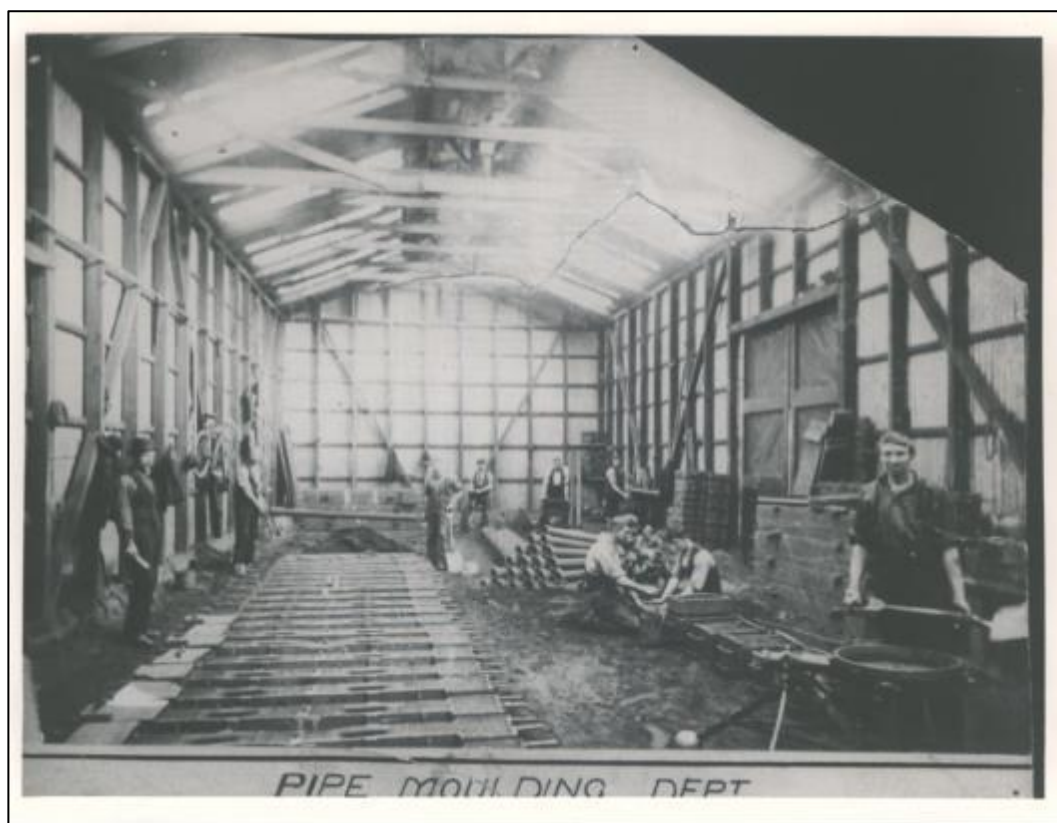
Photograph showing the interior of the iron moulding building. Note that the roof framing is different to that showing to the 1904 plans (Anon., n.d.-e).
